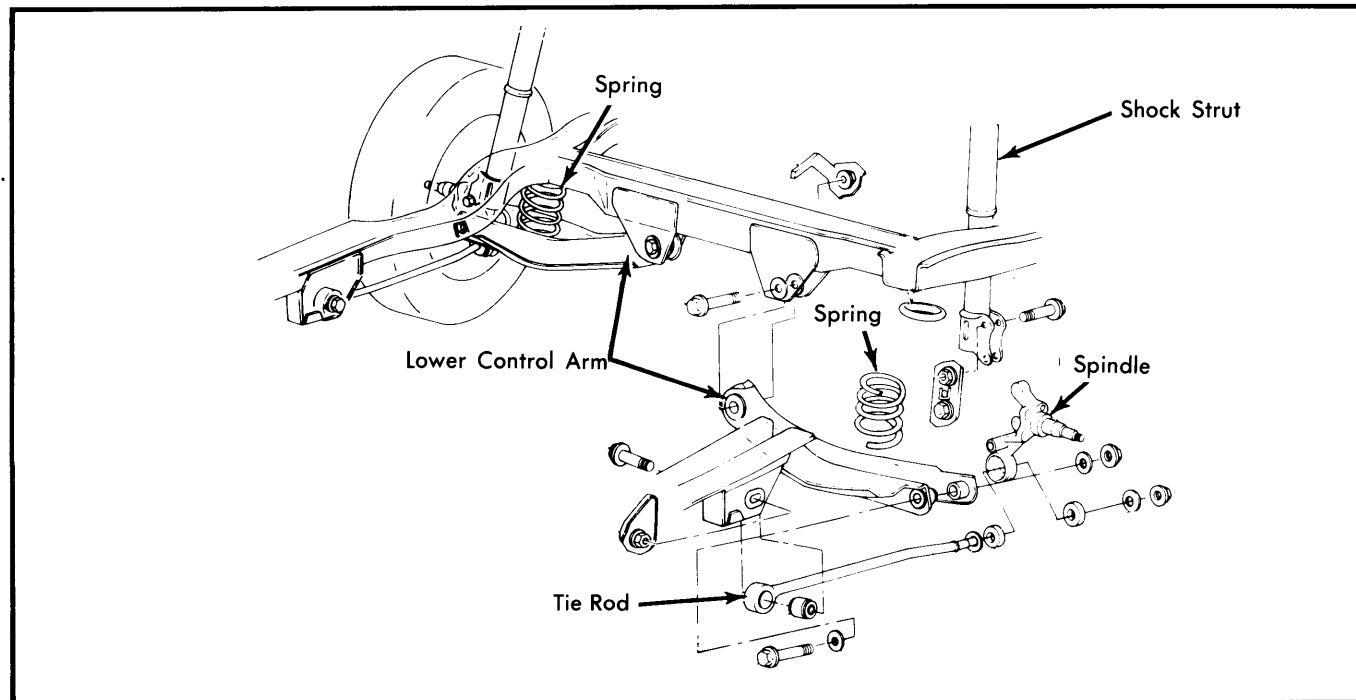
Rear Suspension Assembly (Front Wheel Drive Models)
